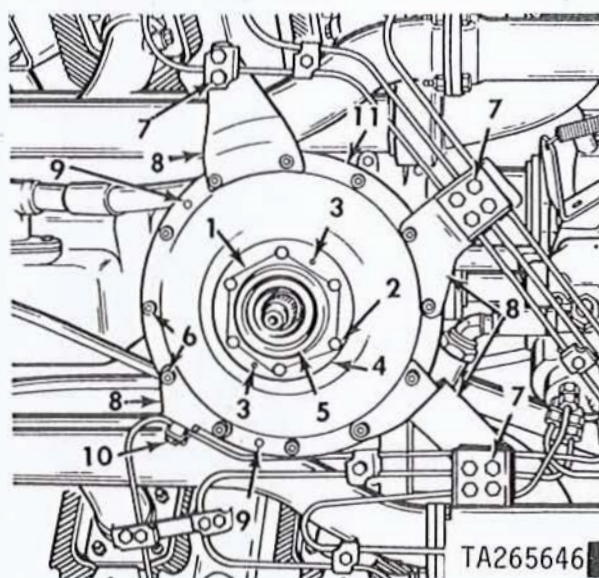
Removing or installing fan drive oil seal and clutch bearing.
